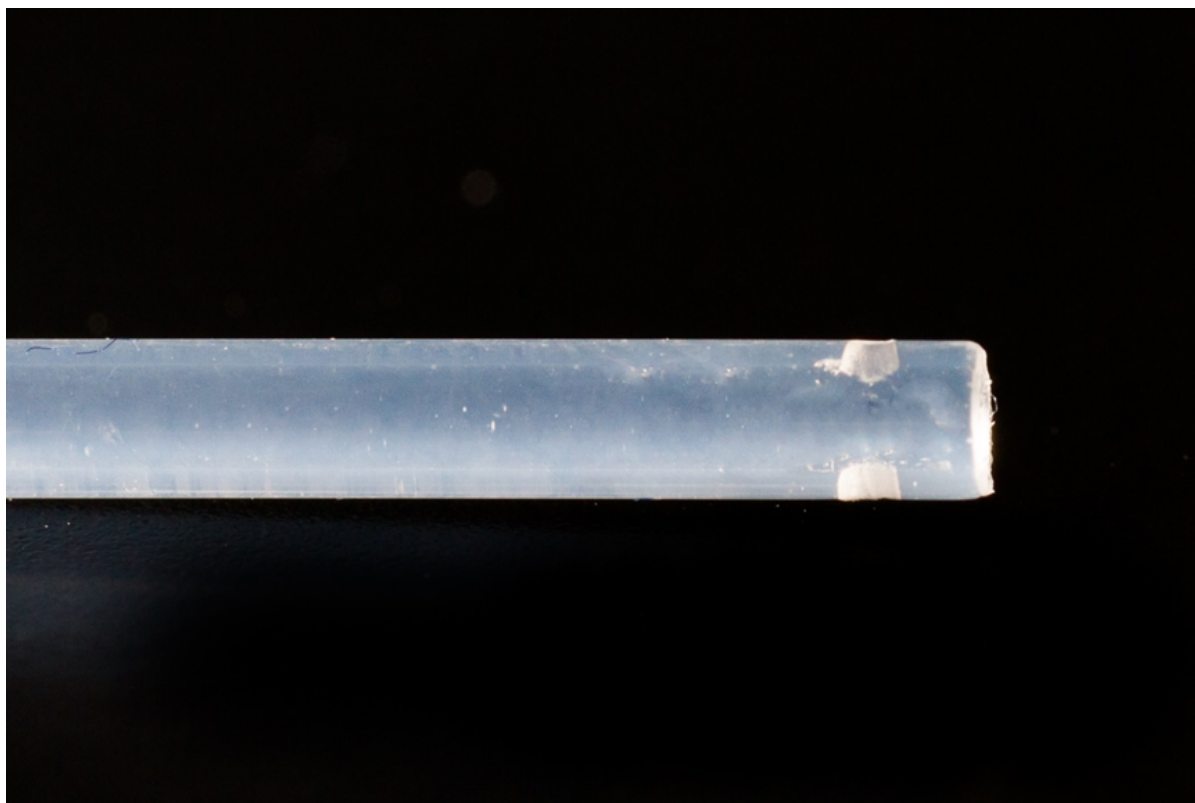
Photograph of the sampling interface consisting of a laser machined 500 μm hole, 500 μm from the edge of a piece of Teflon tubing (1.588 mm O.D., 0.508 mm I.D.).
